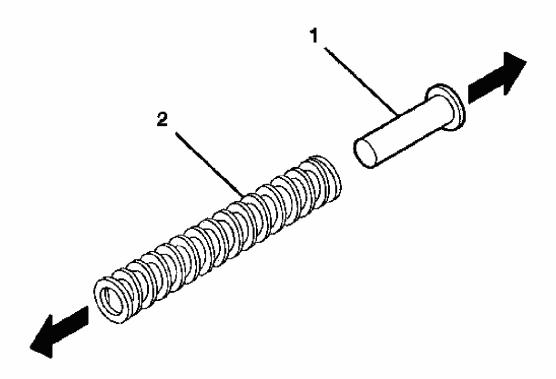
Identifying Spring Guide Components Courtesy of GENERAL MOTORS CORP.
